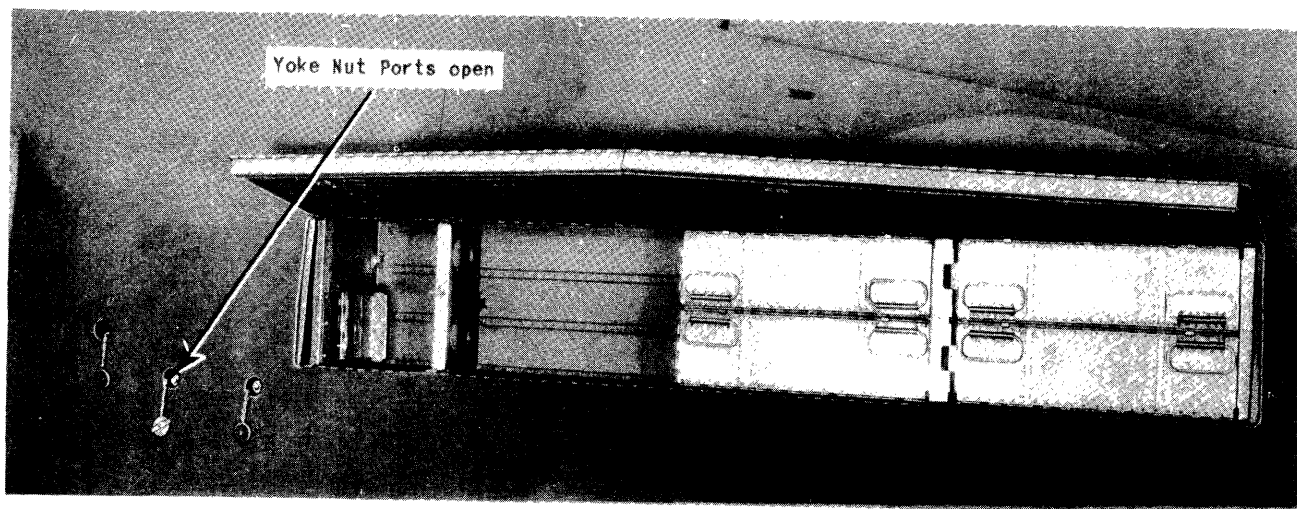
Plan View - Two Outboard Ammunition Boxes Installed
